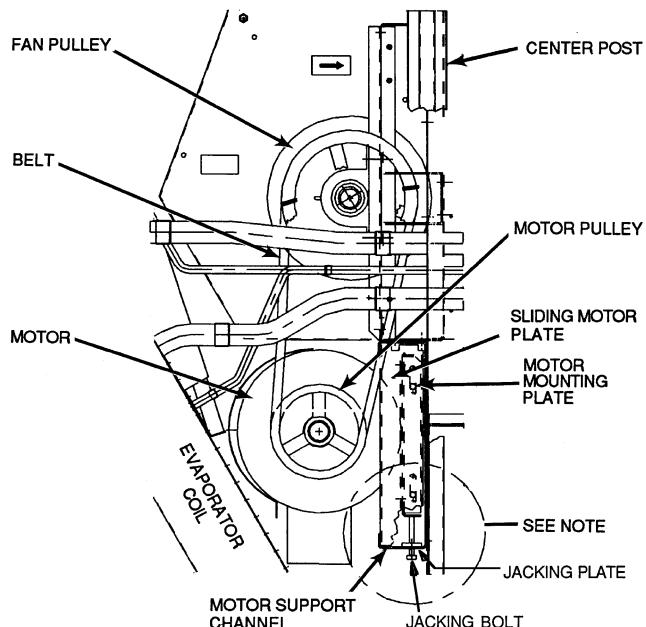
559F180 Evaporator-Fan Motor Section
